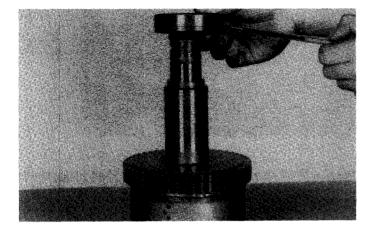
Install clutch shaft bearing. NOTE: Bearing snap ring groove must be down.
